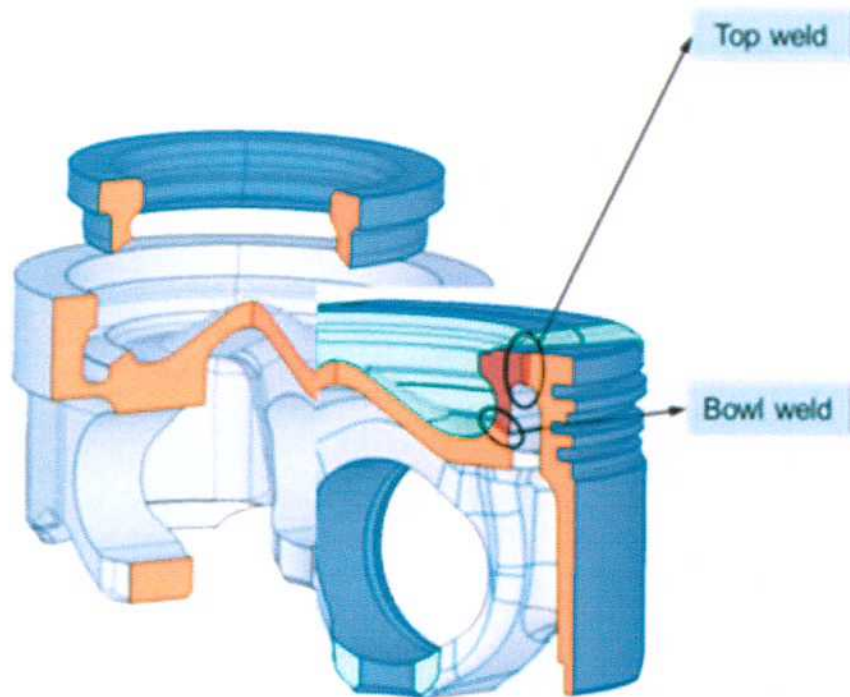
Cut section of piston model with close up of weld seams
